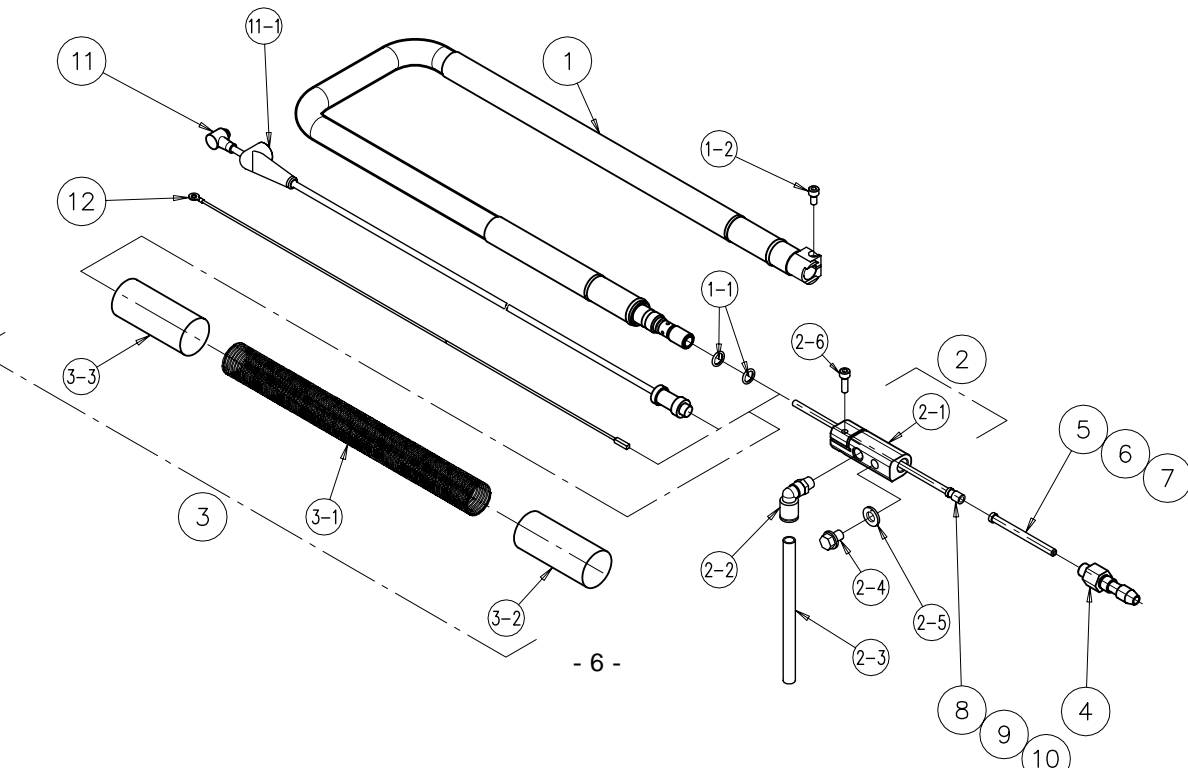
Exploded diagram for the coaxial power cable (For AX-V4AP/DL W.P.S exclusive)
